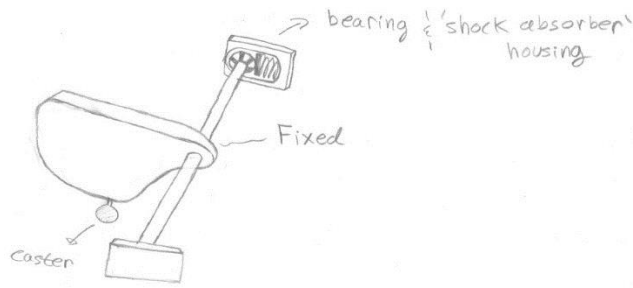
Concept with bearing and spring inside a housing at each end of shaft.
